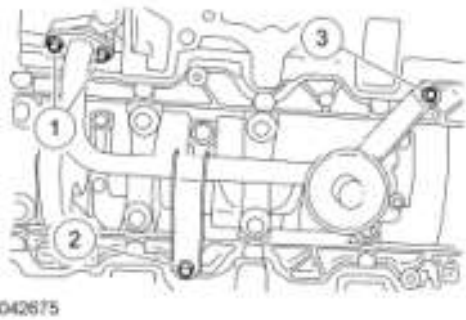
Identifying Oil Pump Pickup Tube With Bolts
